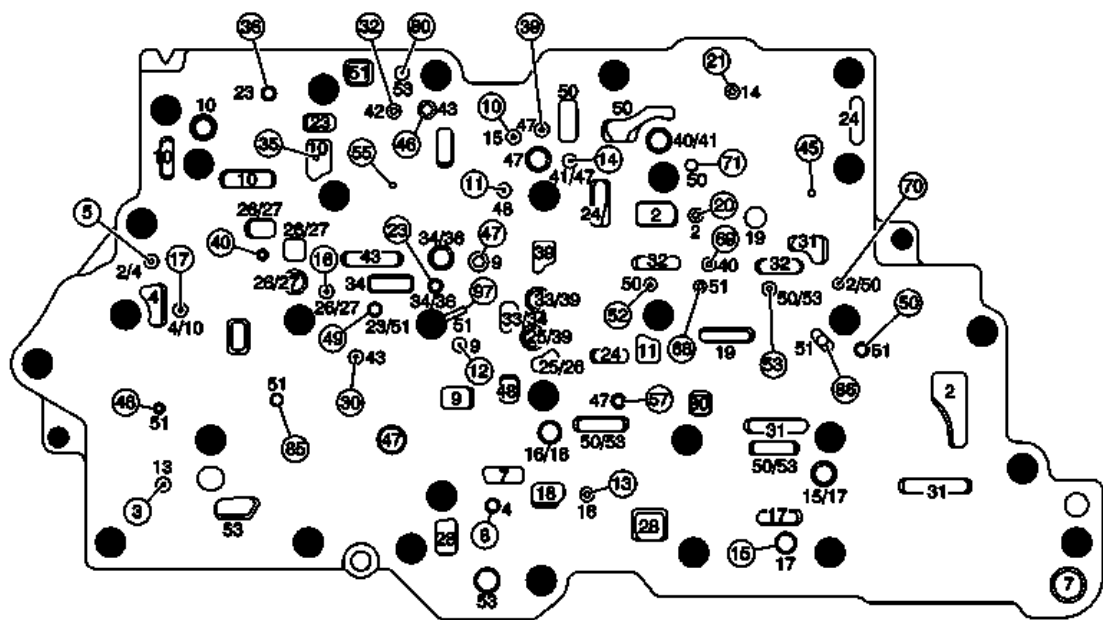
Control Valve Upper Body Spacer Plate Assembly
